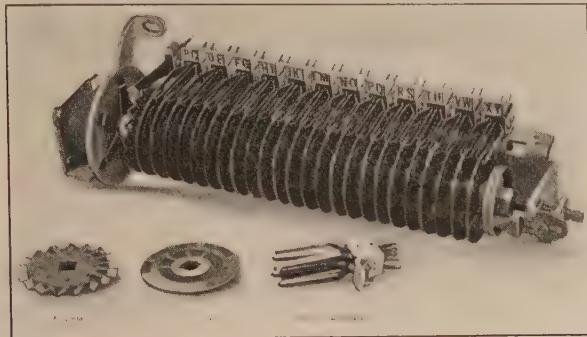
SEQUENCE SWITCH ASSEMBLY
